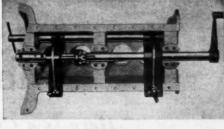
The bearings should be hand scraped or reamed nearly to size with an aligning reamer like that in the above illustration.
